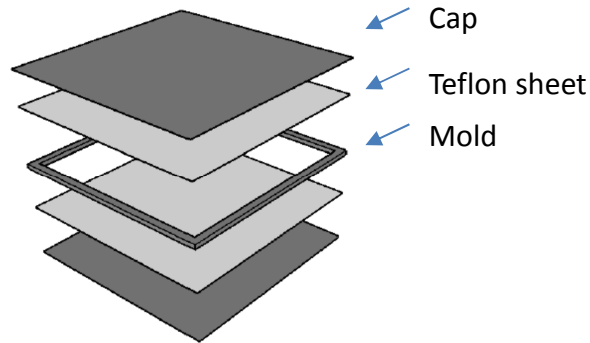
Mold used for thin (3.4 mm thickness) sheets.
